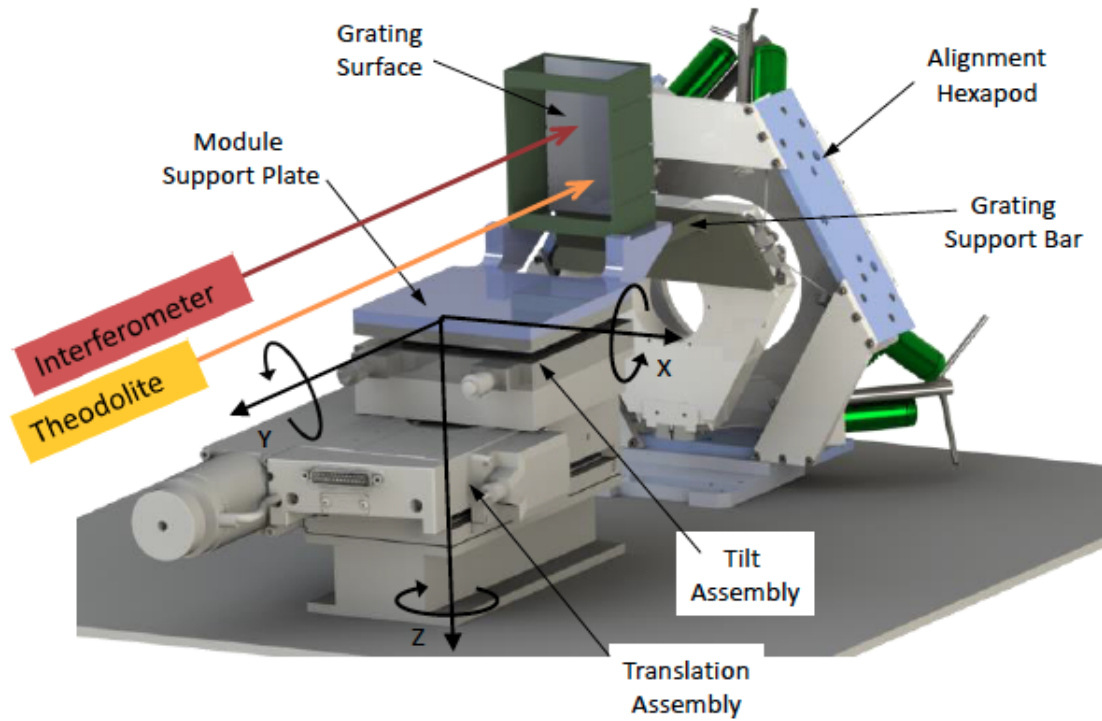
An example of a grating alignment assembly that could be used to position the OGRE gratings in the flight module. The CMM laser apparatus and theodolite are outside the picture, but can access the grating's optical surface.
